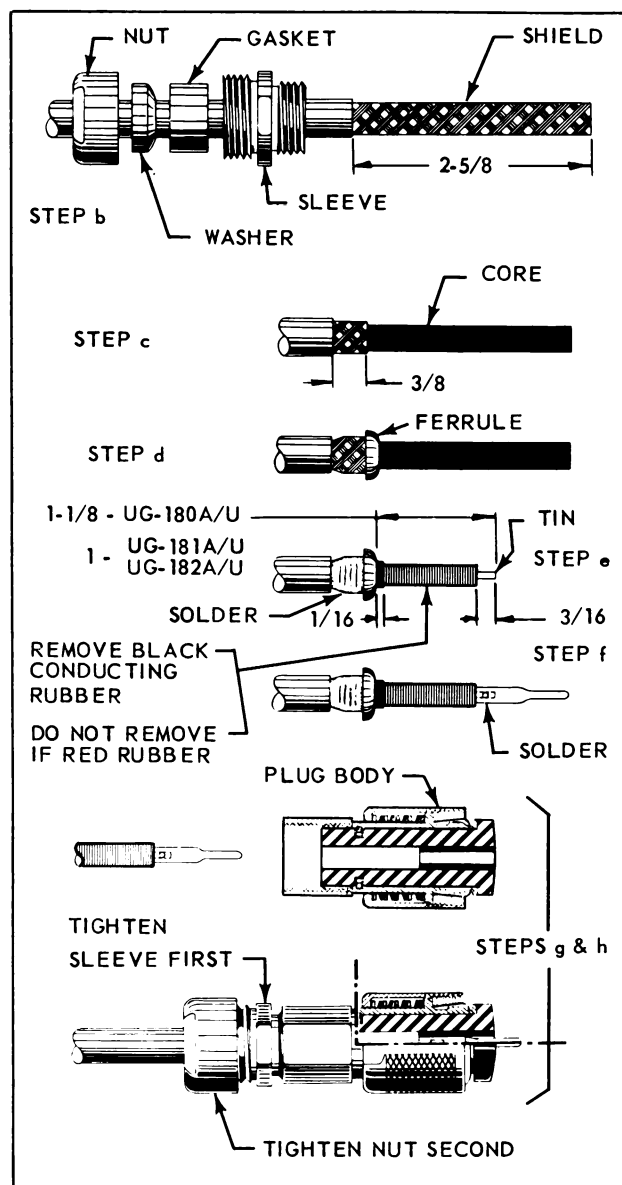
Assembly of Rubber Insert Pulse Connector
